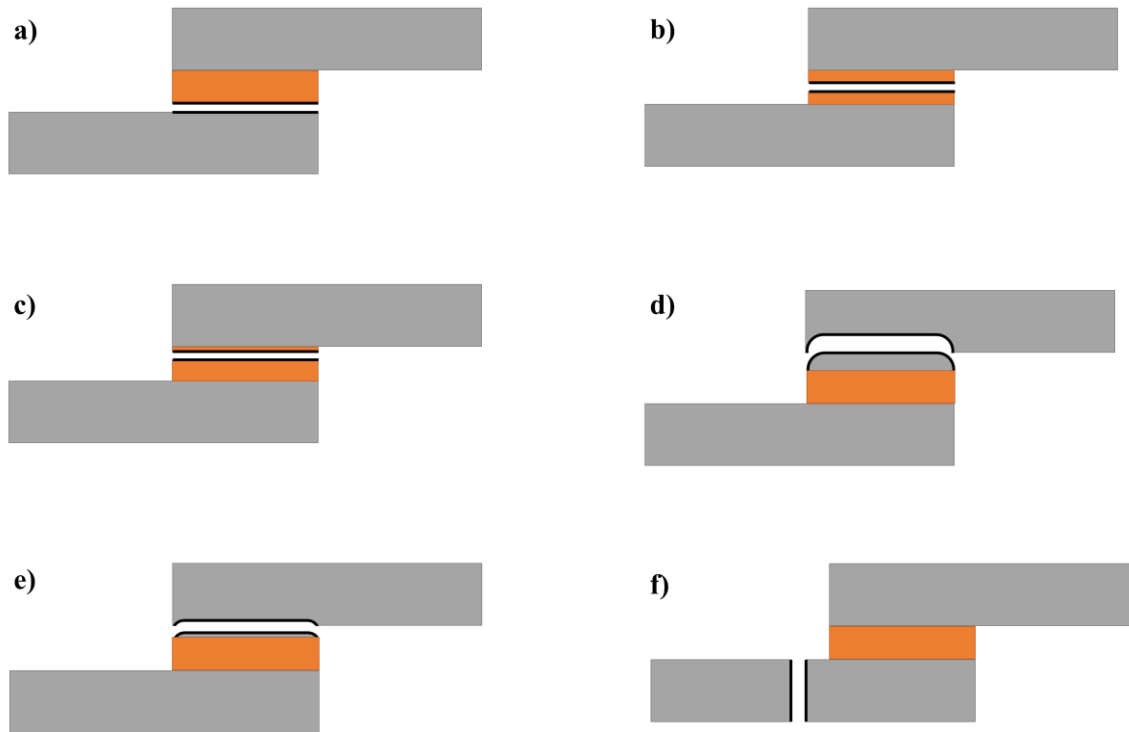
Different failure modes occurred in adhesively bonded composite joints: (a) adhesive (interfacial) failure, (b) cohesive failure, (c) thin-layer cohesive failure, (d) fibre-tear failure, (e) light-fibre-tear failure and (f) stock-break failure.
